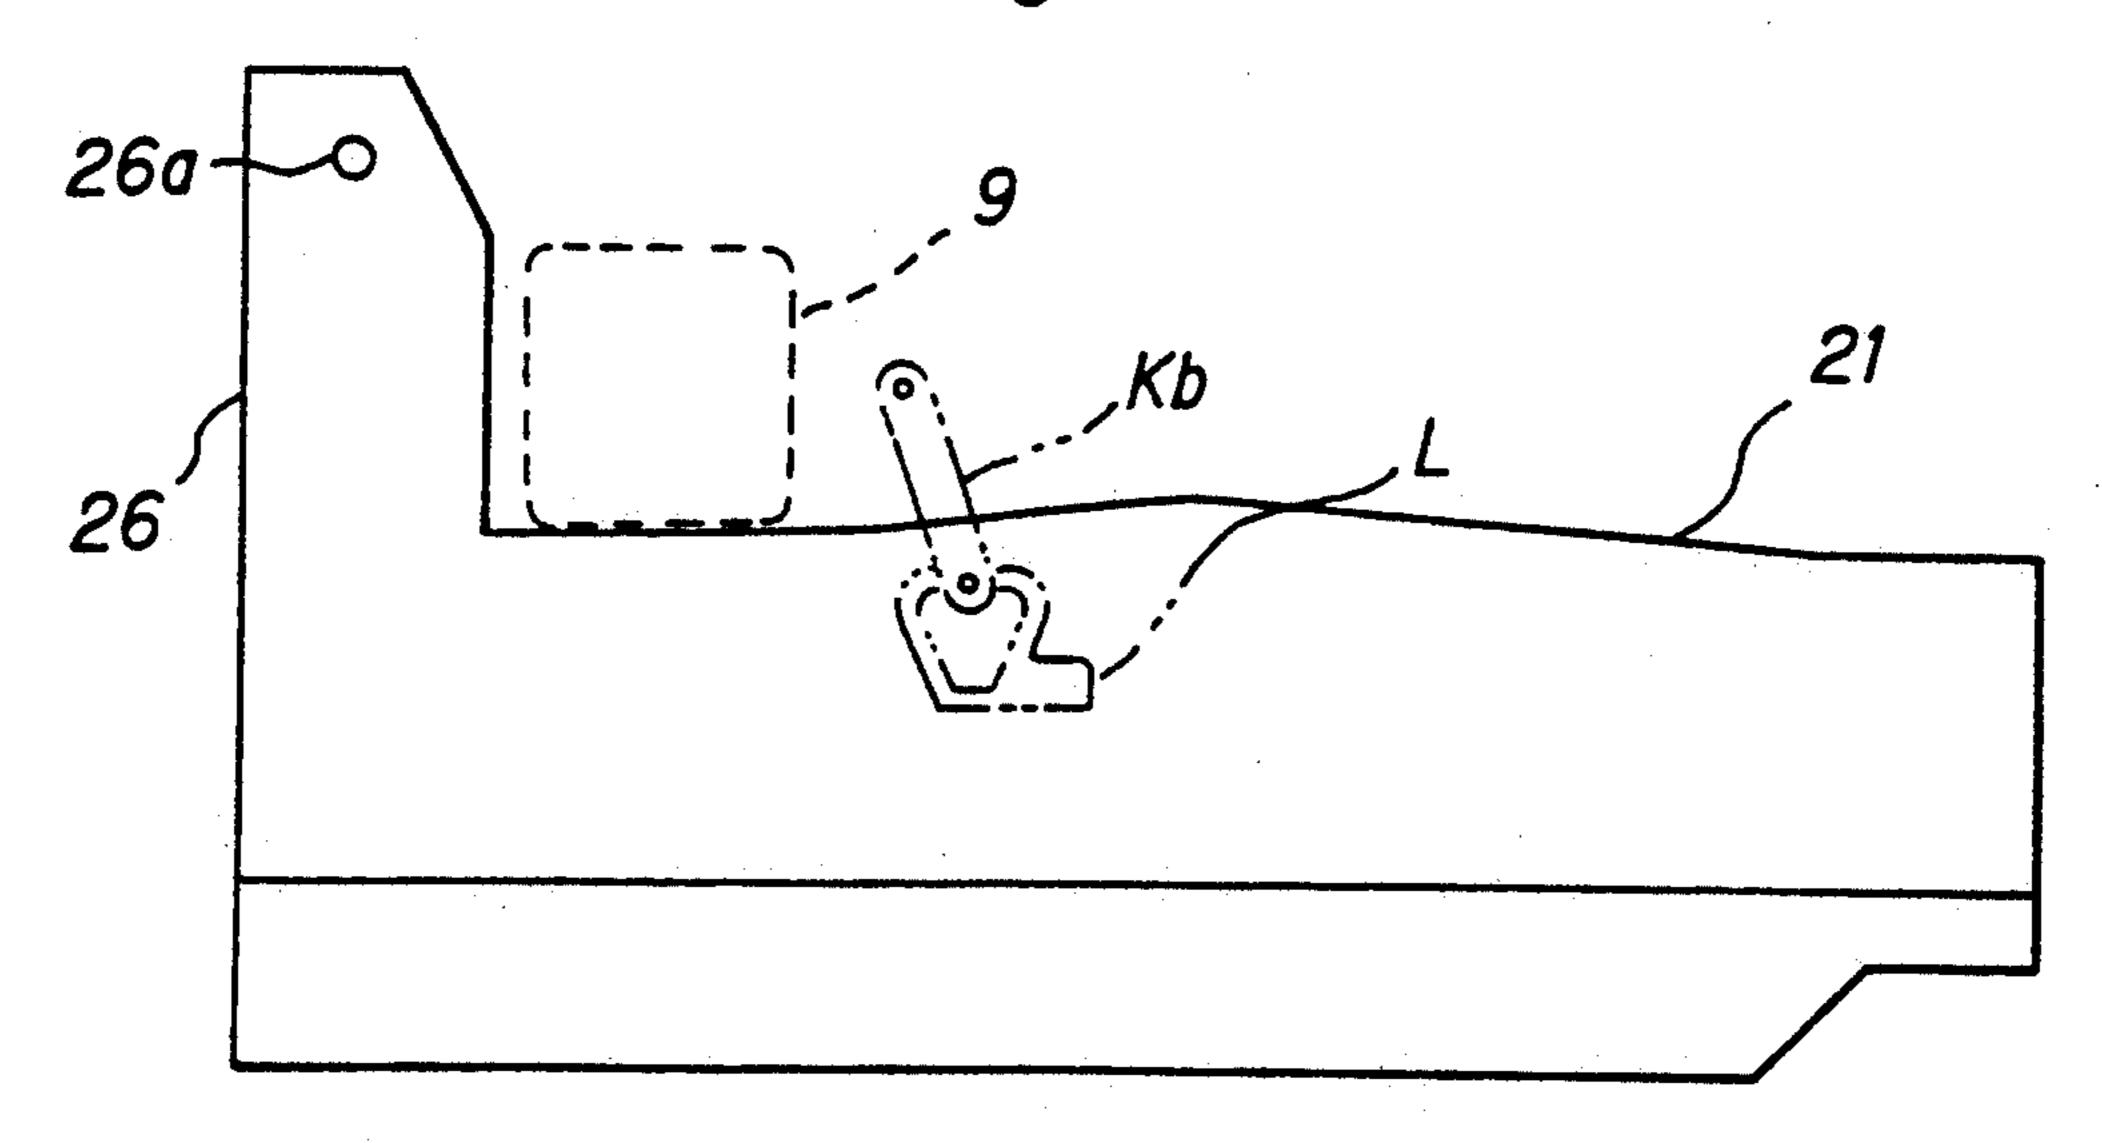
IMAGE FORMING MACHINE COMPRISING THREE SEPARABLE FRAMES WITH OPENING/CLOSING MECHANISMS BETWEEN EACH FRAME
